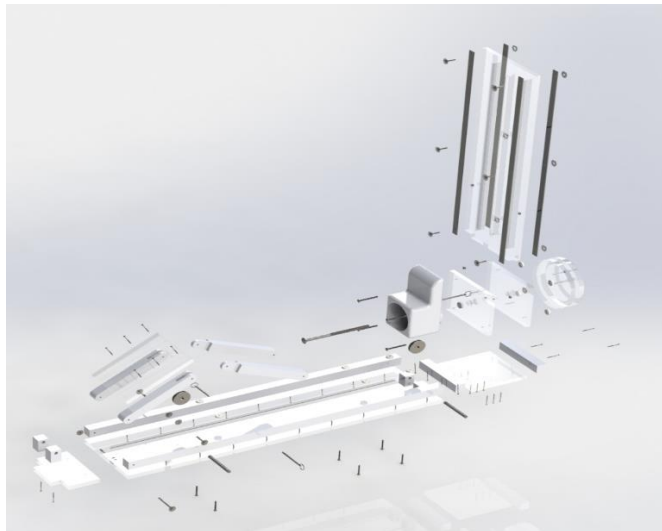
CAD Geometry of Exploded View of Bottom Base Assembly
